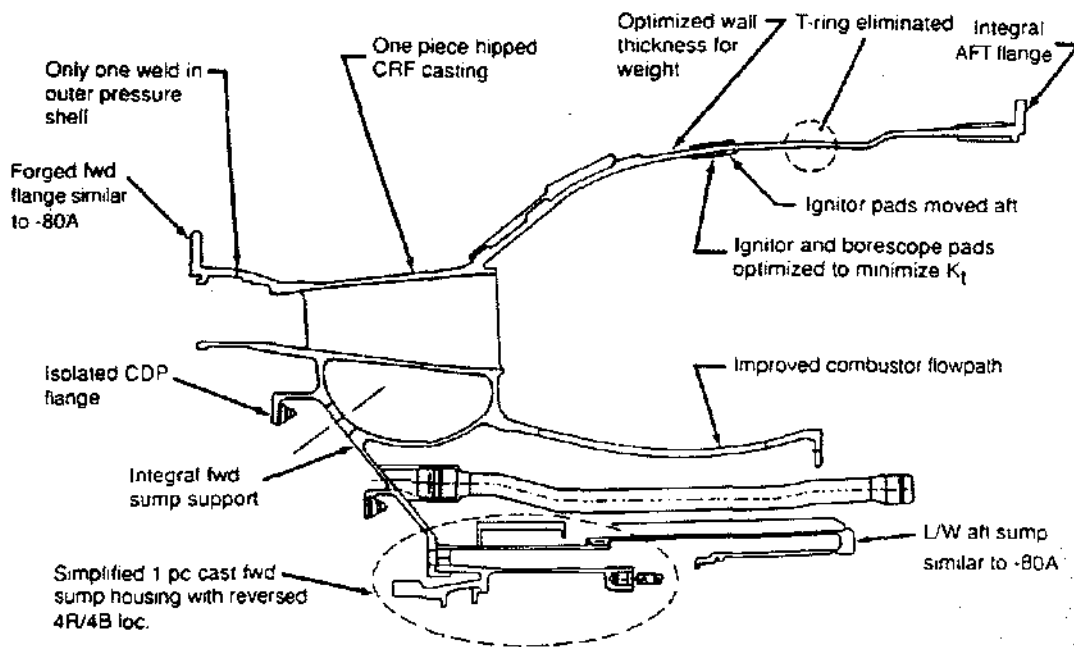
CF6-80C2 Compressor Rear Frame Design Features
